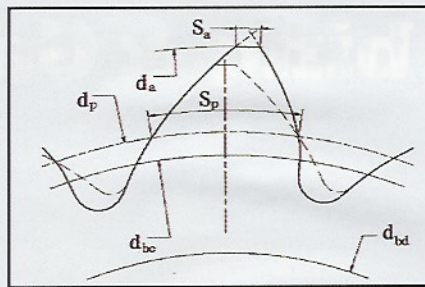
ASYMMETRIC TOOTH PARAMETERS
